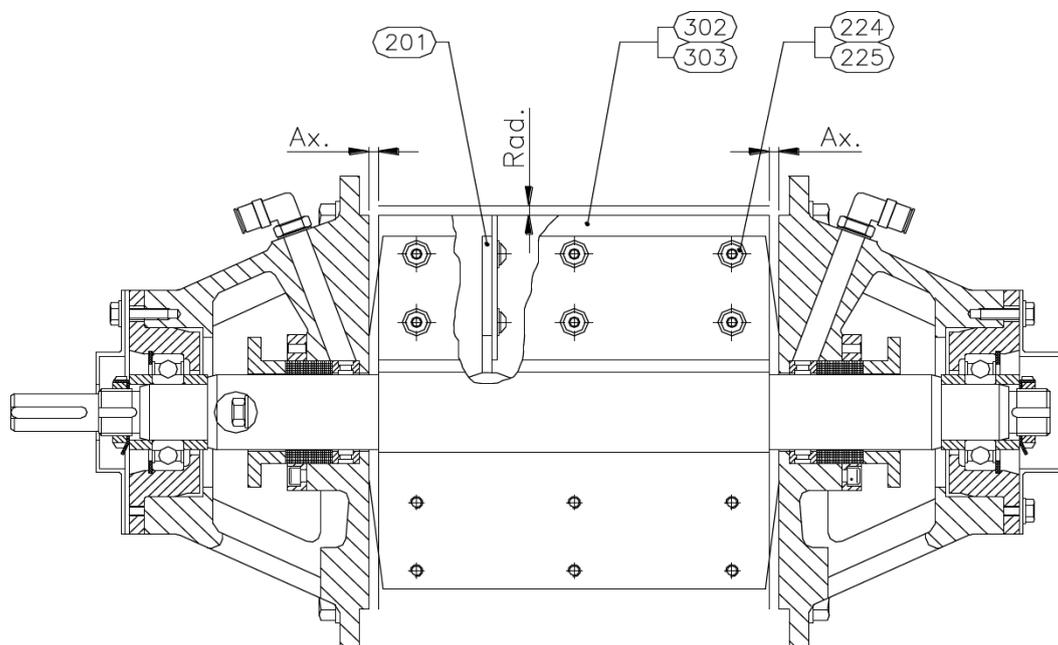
Adjustment for axial and radial clearance rotor blades
